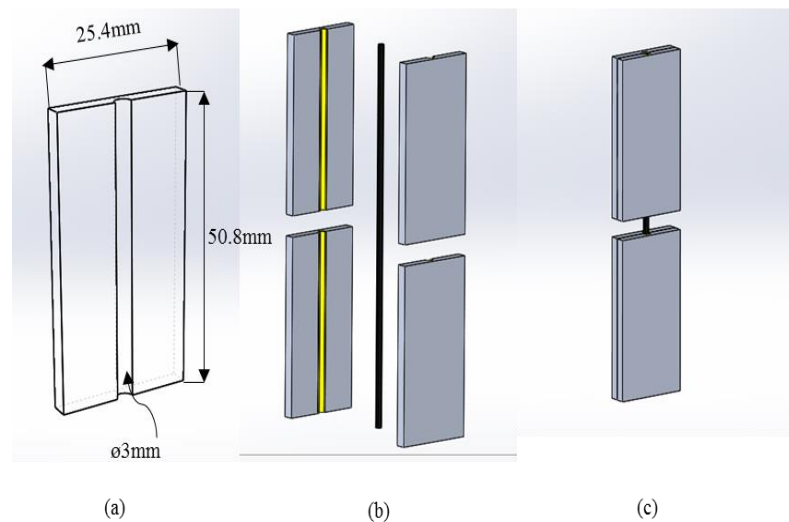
AS4 bundle test sample preparation (a) aluminum sample holder 2” by 1” and 1/8” thick (b) gluing the bundle between two aluminum plate inside the cylindrical channel with epoxy (c) bundle test sample with 6 mm gauge length which is adjustable.
